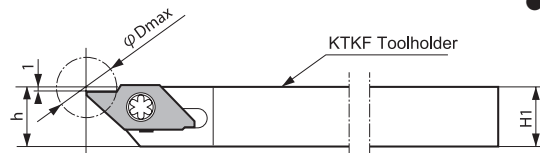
When a TKF-AS insert is attached (The cutting edge is 1 mm lower than the center line.)
